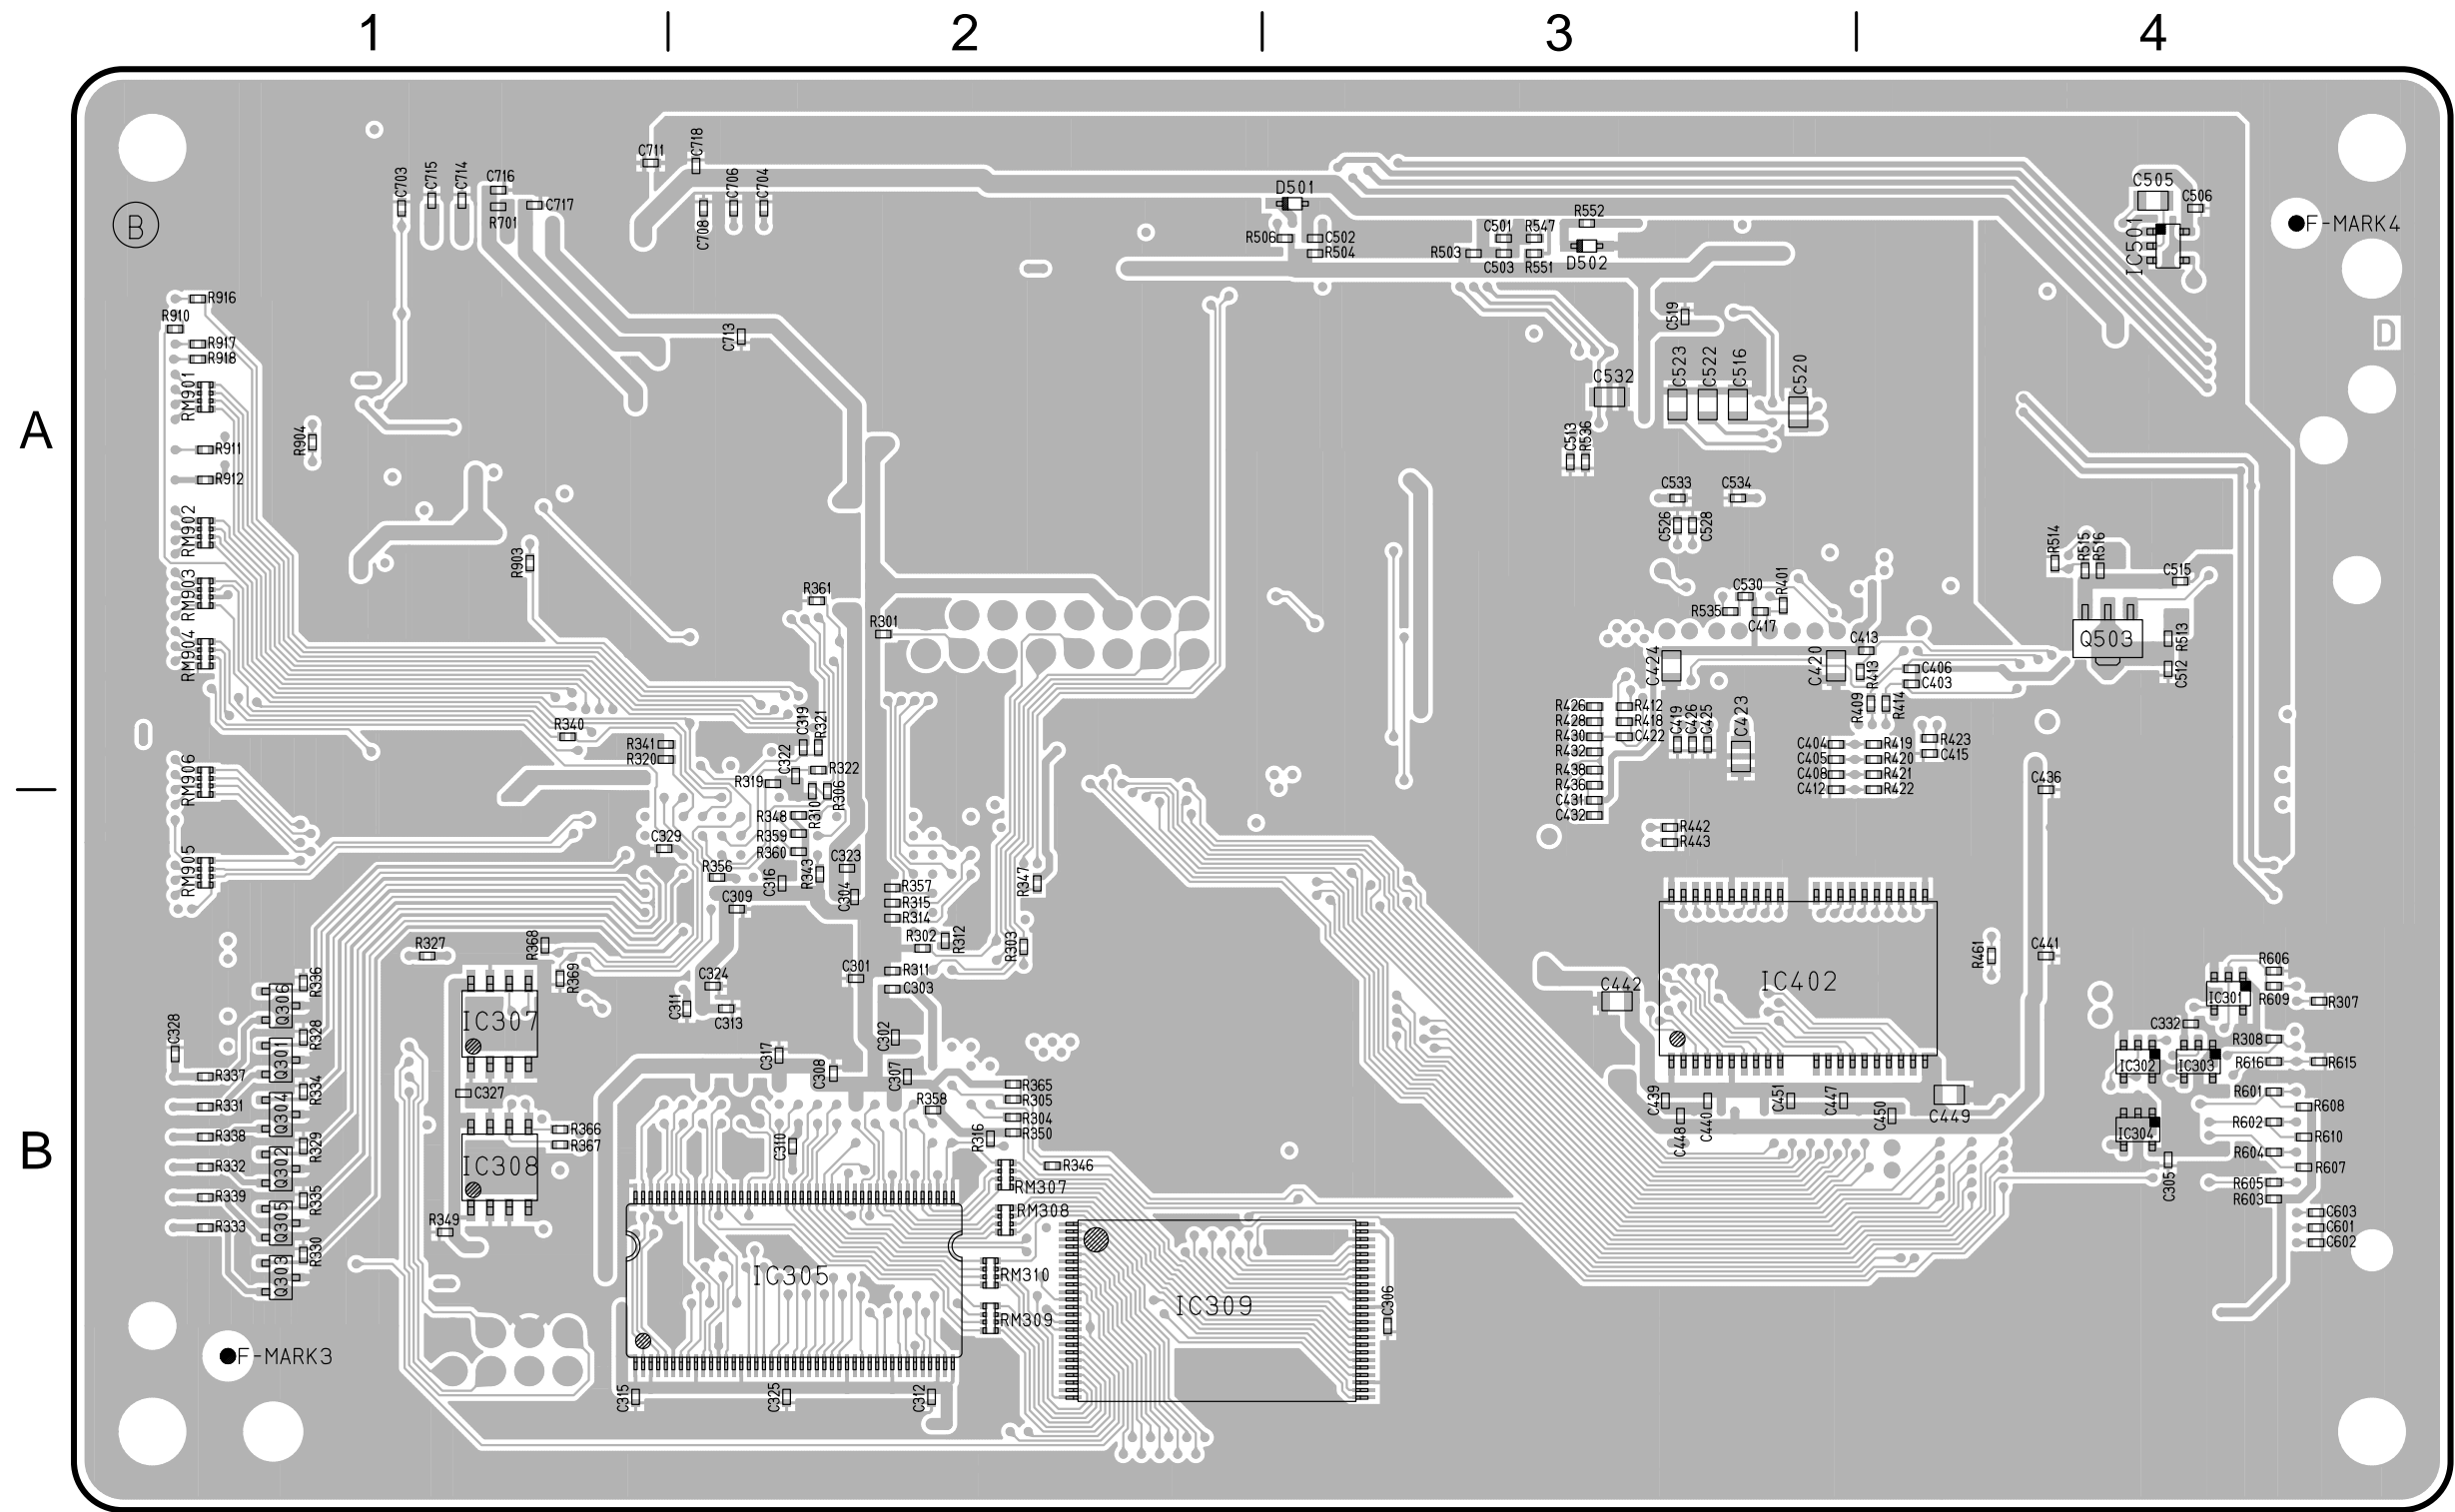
EU01 Main PC Board (Bottom pattern and bottom parts location diagram)
